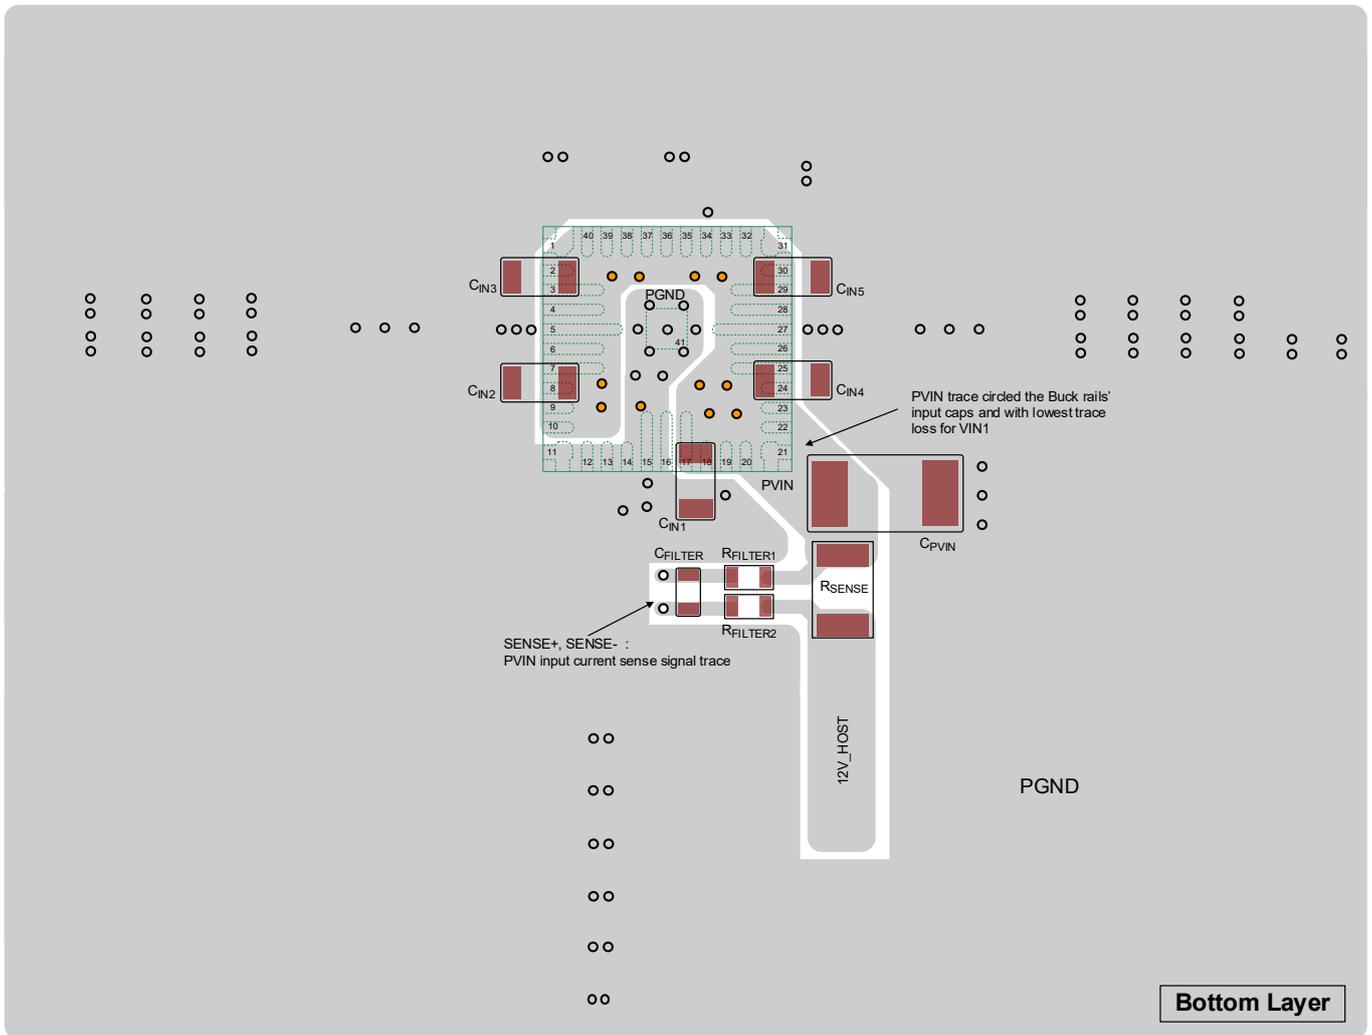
PCB Layout Reference of Option 1 (Bottom Layer, top view)
